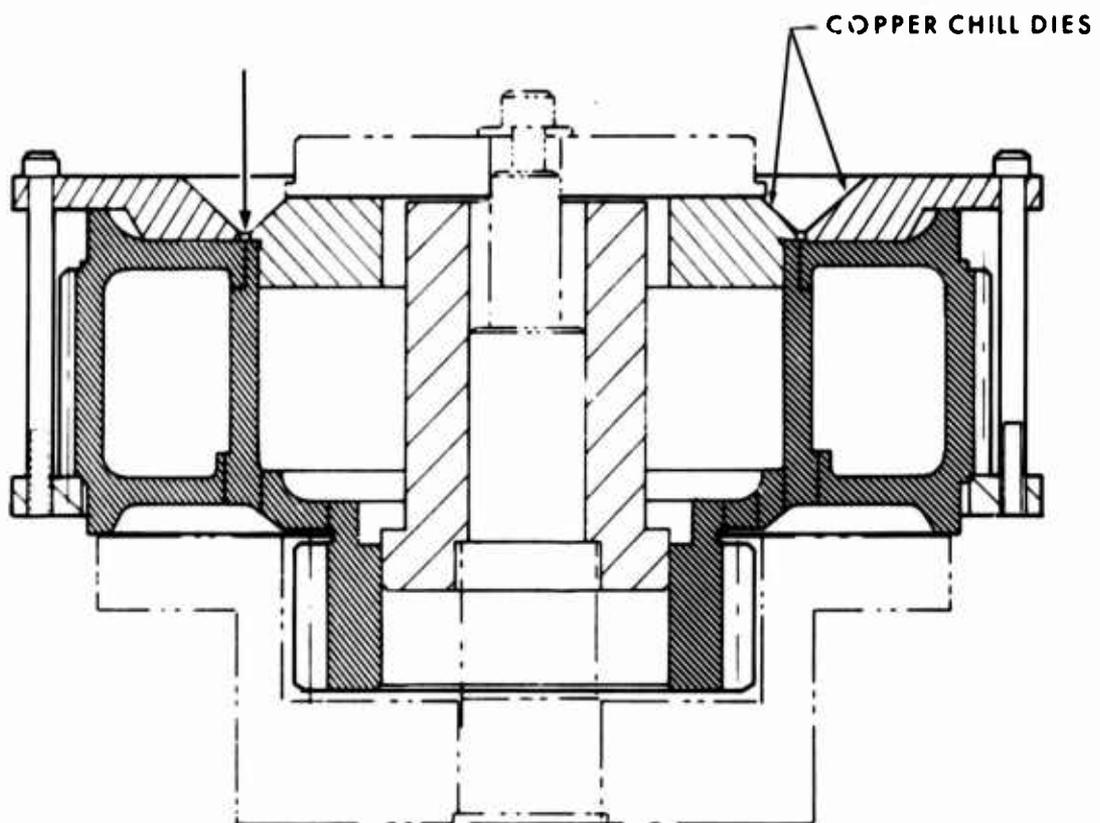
Welding Fixture for Second-Row Pinion Large Gear to Shaft Upper Weld.
